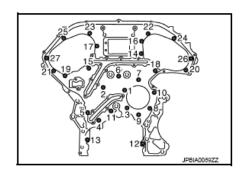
Identifying Rear Timing Chain Case Bolts With Tightening Sequence
